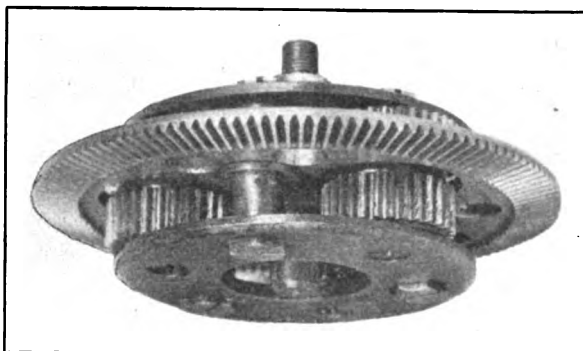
Bijur (rear end) starter bevel and idler gear assembly.
